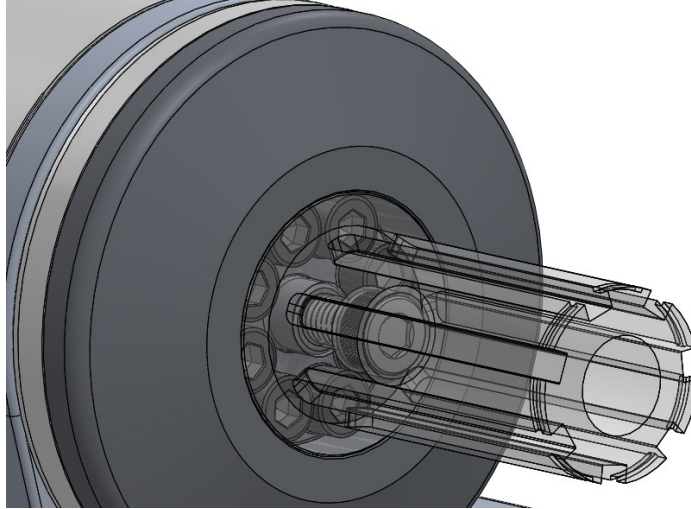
Distal shaft interface to the lateral side of the motor using existing hardware
